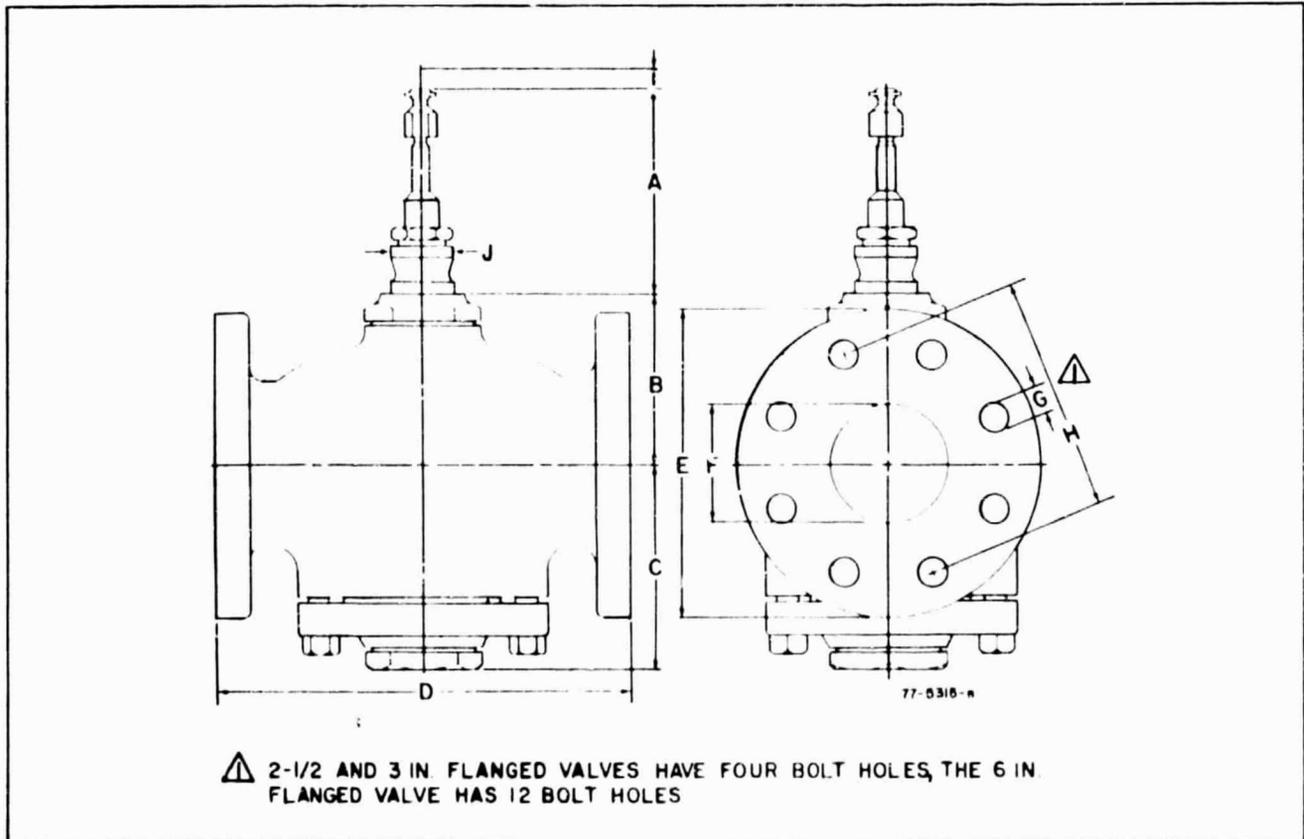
V5011B & E FLANGED BODY DIMENSIONS (REFER TO TABLES 5 AND 6)
